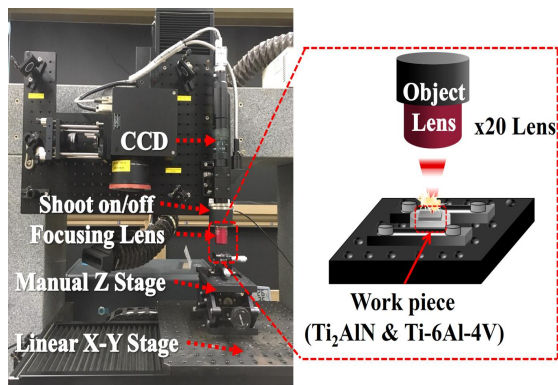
Photo and workpiece for femto-second laser micro machining set-up
